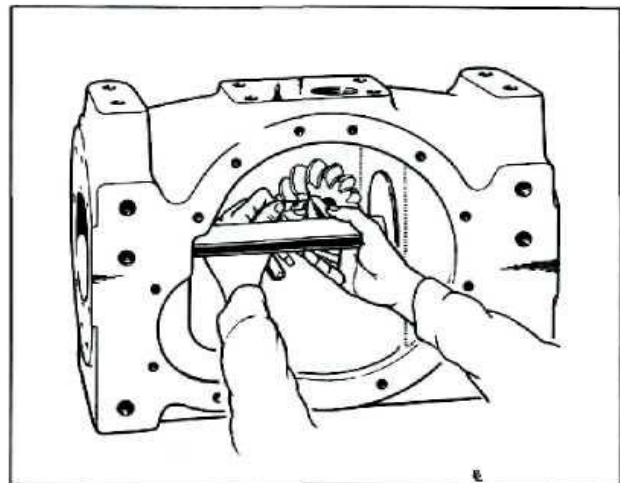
Measuring Pinion Head to Bar Gap.
